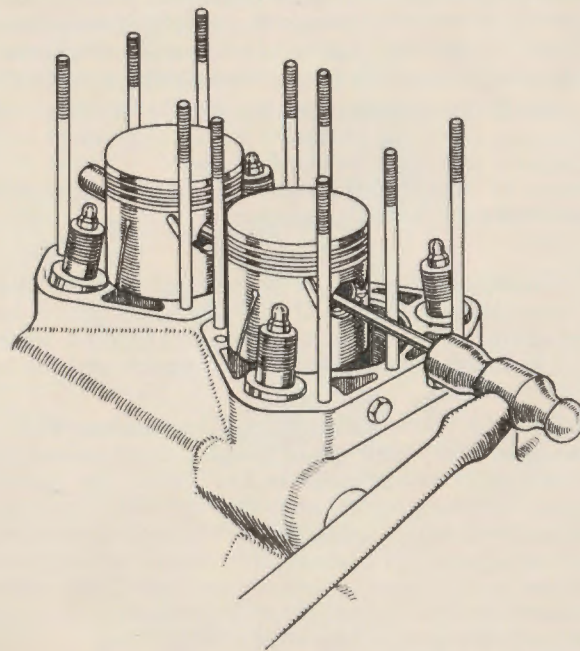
Positions in which the pistons should be held while the far gudgeon pin is being tapped out by a rod passed through the nearer piston.
